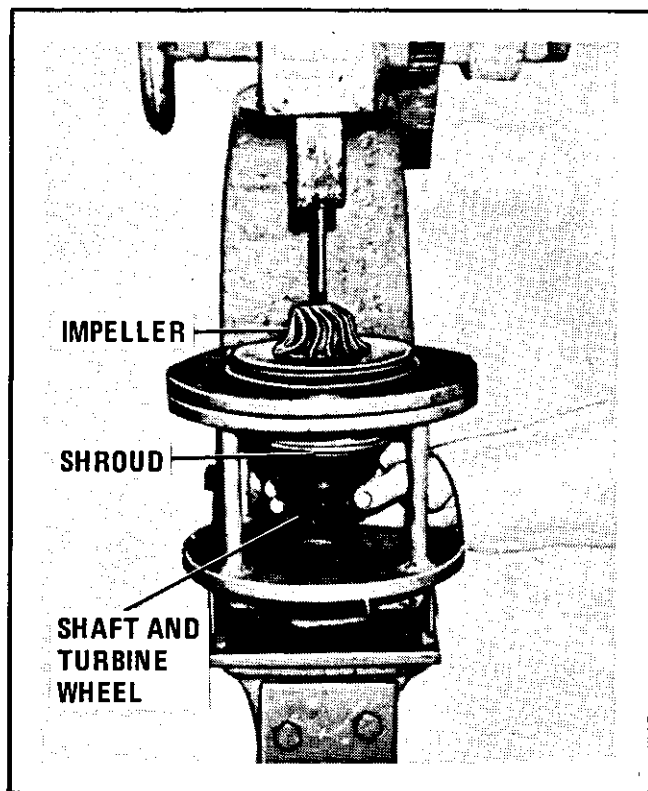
Pressing shaft and turbine wheel from turbocharger impeller
